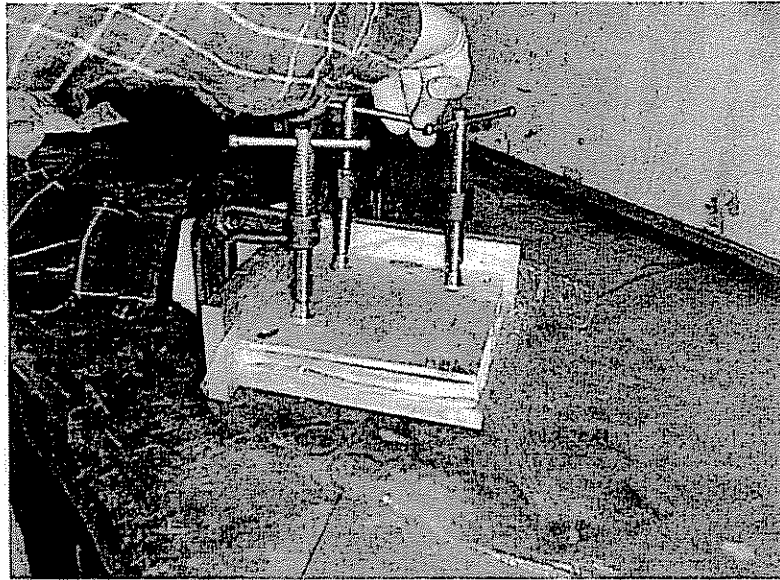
Tightening C-clamps in all four corners of alignment jig. Note the green adhesive beginning to "squeeze out" of panel edge.
